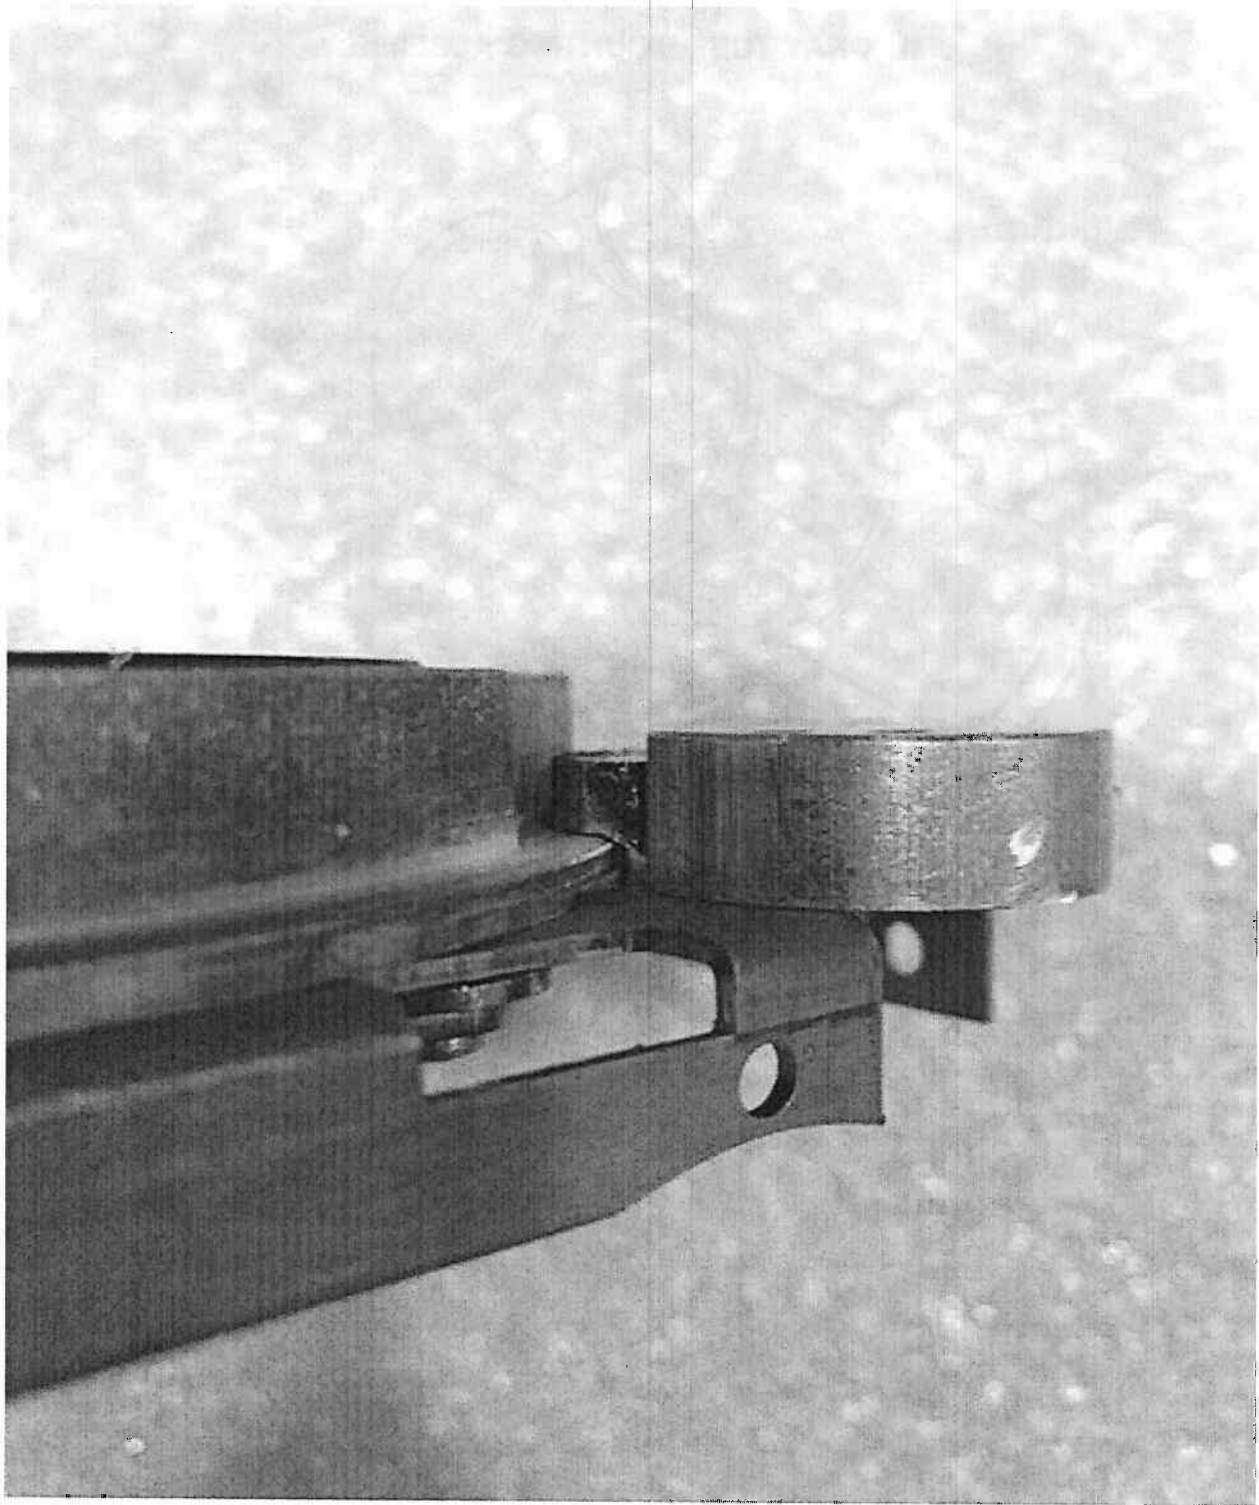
B - Properly Seated Mounting Lug Slide on the Flange of the Mounting Ring
